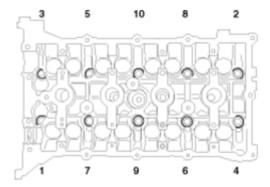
Identifying Cylinder Head Bolts Removal Sequence Courtesy of KIA MOTORS AMERICA, INC.
